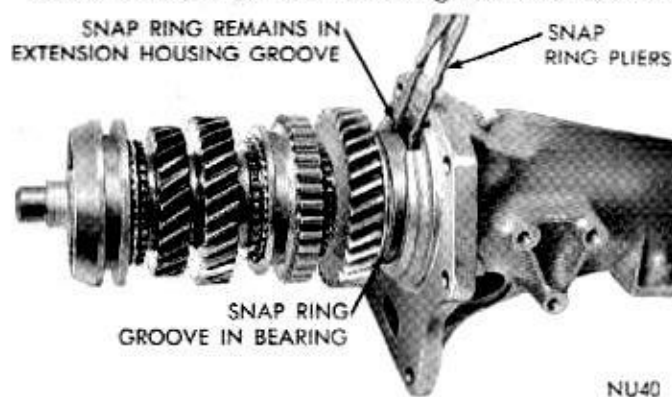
Removing or Installing Mainshaft (Heavy Duty Model)
